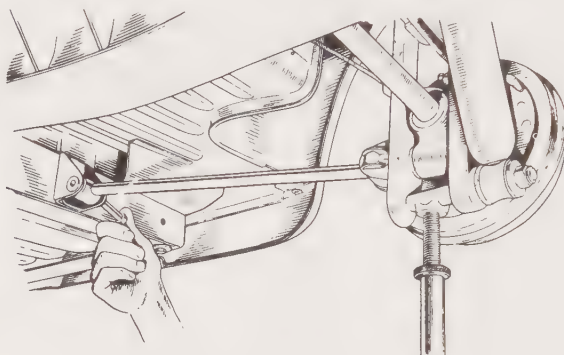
15 Refitting tie-rod bolts, using jack to assist by adjusting height.
